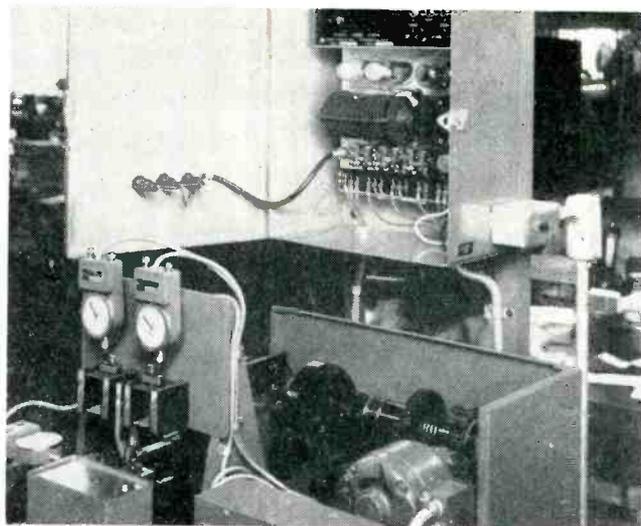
Parts pass through sensing heads and are dropped into proper disposal chute set by measuring unit
